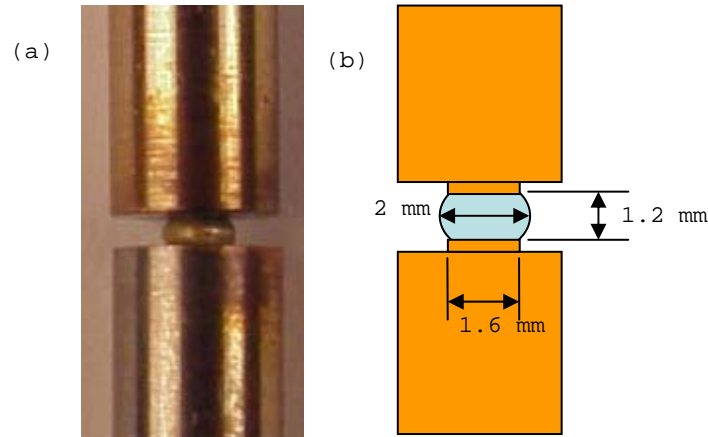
(a) Picture and (b) schematic of completed SJS ball-type joint.
